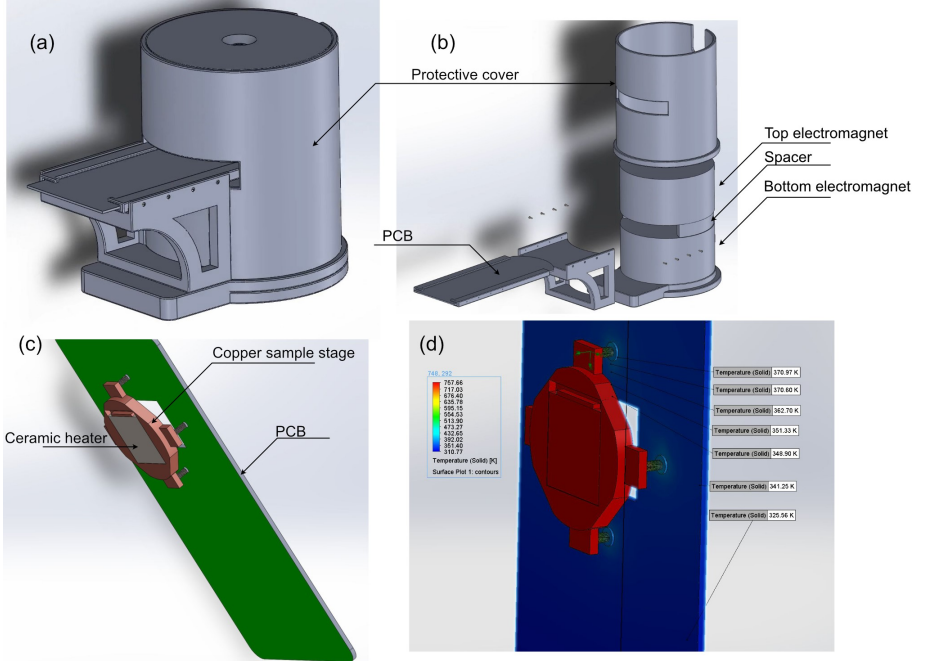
(a) 3D-model of room temperature Hall measurement setup. (b) Exploded view of the setup showing placement of electromagnets. (c) Design of the Printed Circuit Board (PCB) with attached copper sample stage. A ceramic heater is mounted on the backside of the stage to perform Hall measurements at elevated temperatures as high as 400°C . (d) Simulation of the temperature gradient between sample stage and PCB when the heater is set to 400°C
